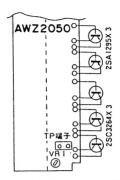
Dynamic Power Supply Assembly Adjustment
